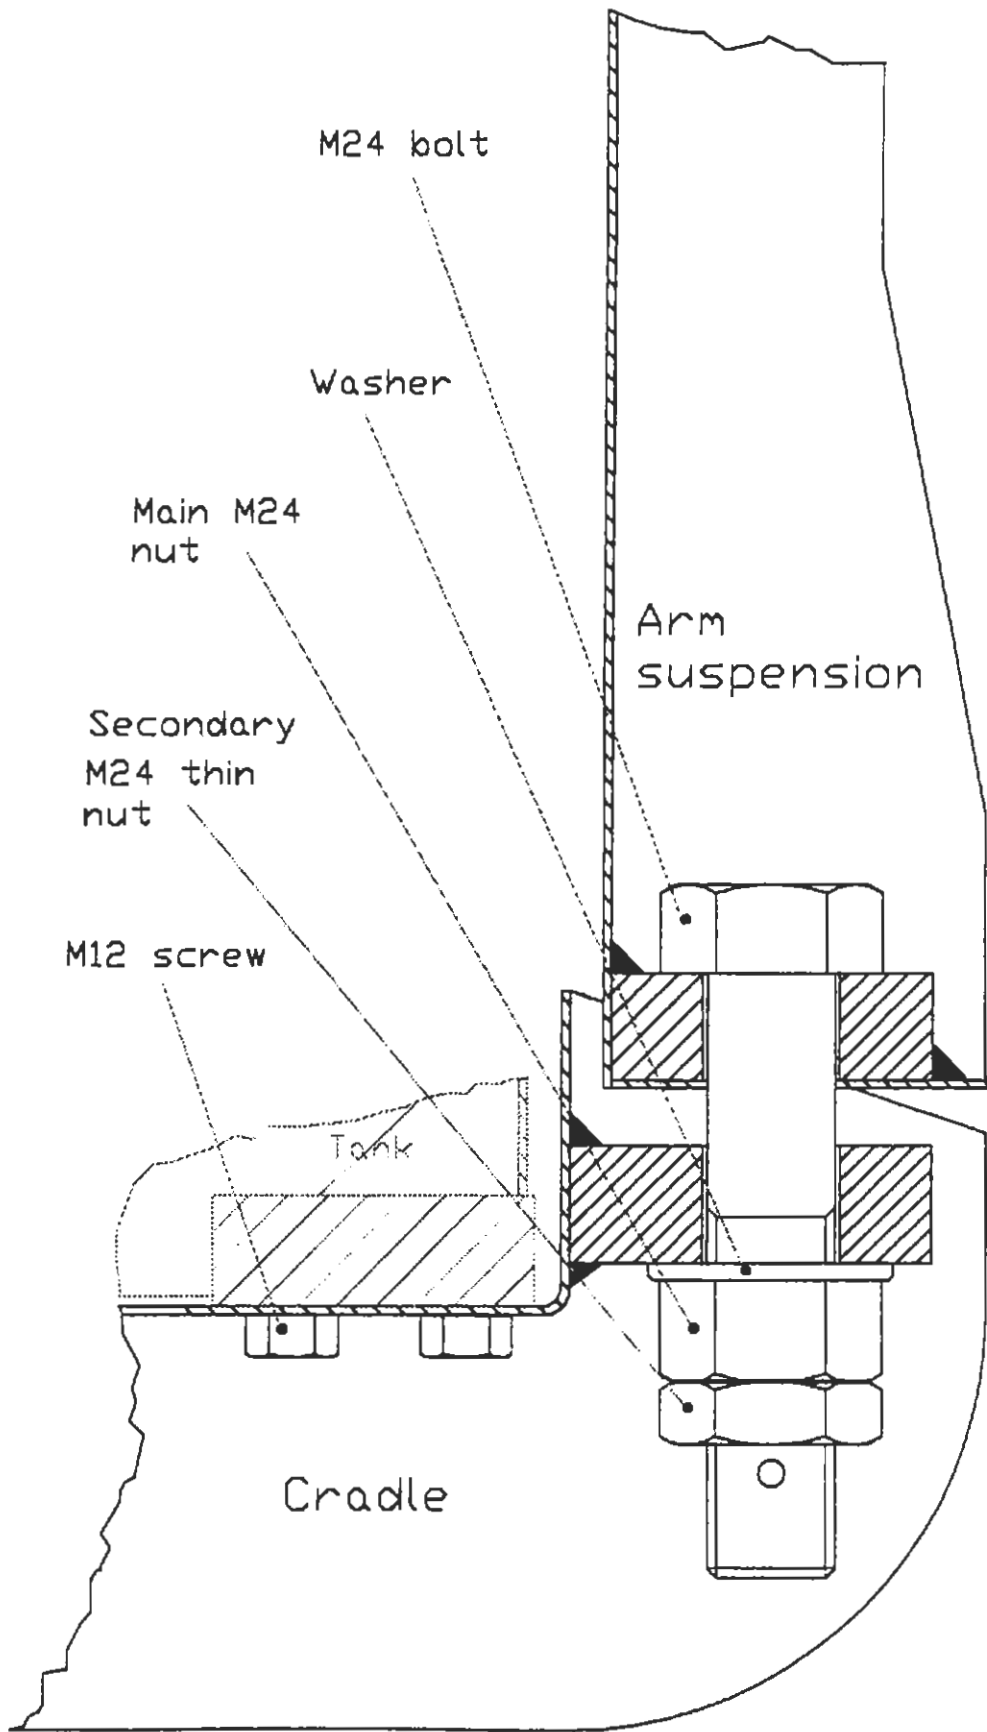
Assembly drawing of a tank suspension joint (not to scale)
